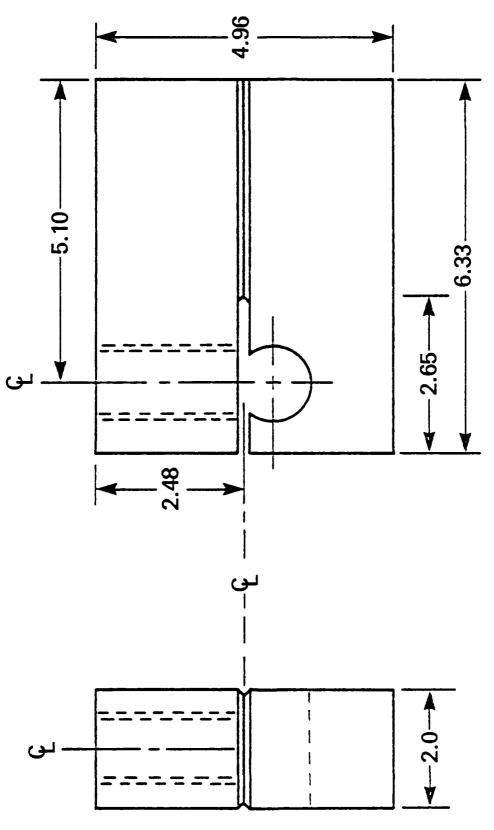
Configuration and dimensions of the 2T bolt-loaded wedge-opening-loaded (WOL) fracture mechanics specimen used for stress-corrosion cracking tests. Dimensions are in inches.
